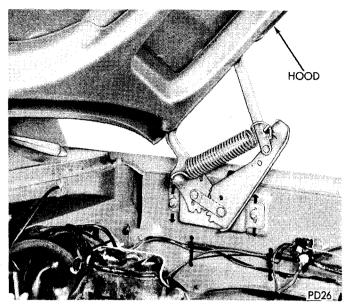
Hinge Adjusting Points (D-W1-2-3)
